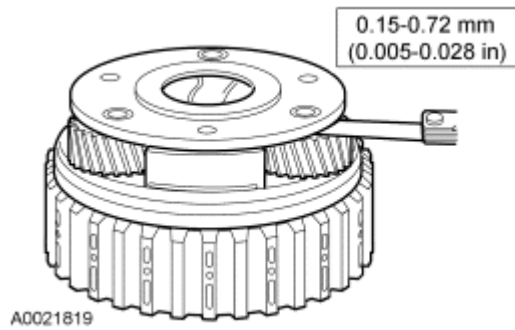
Checking Reverse/Overdrive Carrier Assembly End Play With Specification
